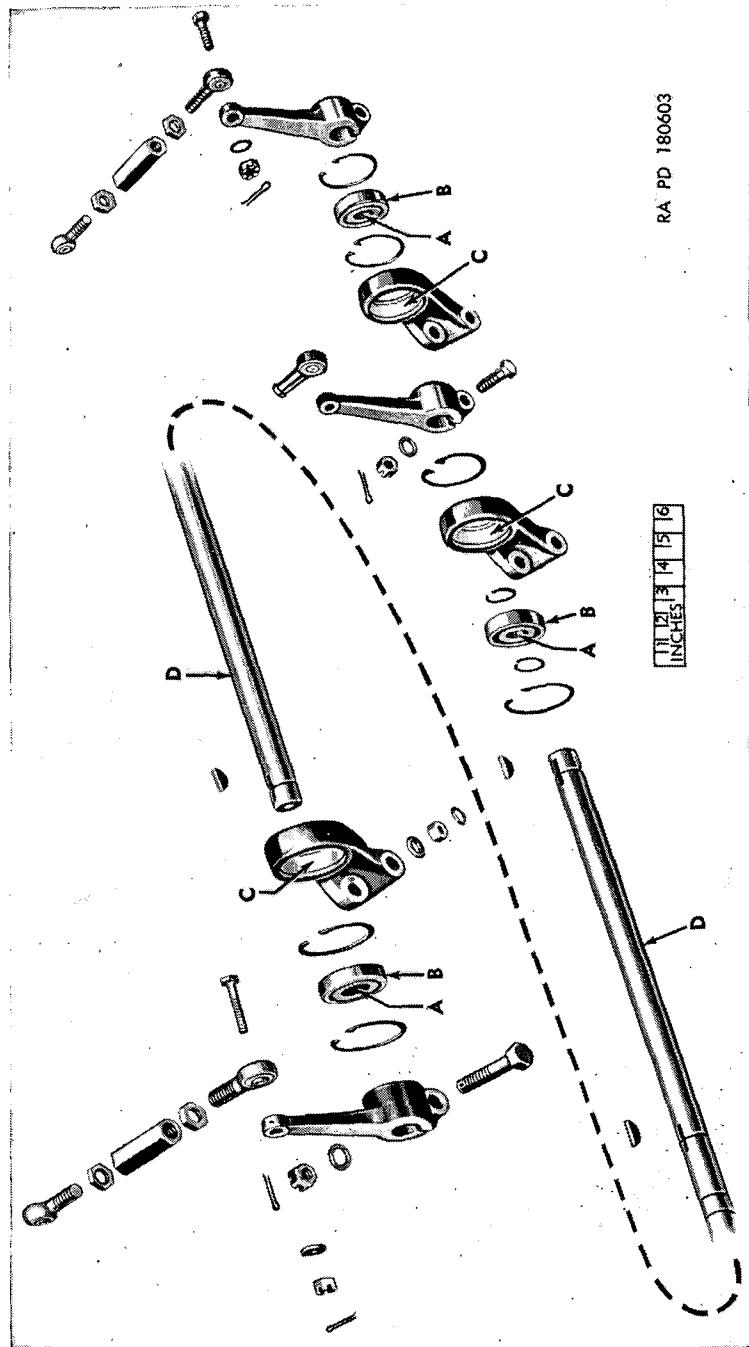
Repair and rebuild standard points of measurement for throttle linkage-cross shaft assembly.
